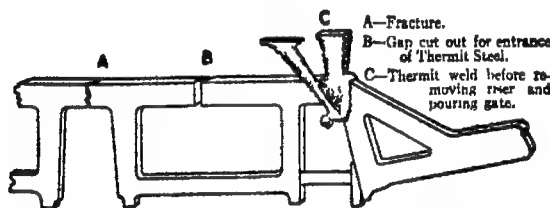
Steps in making a Thermit locomotive frame weld.
